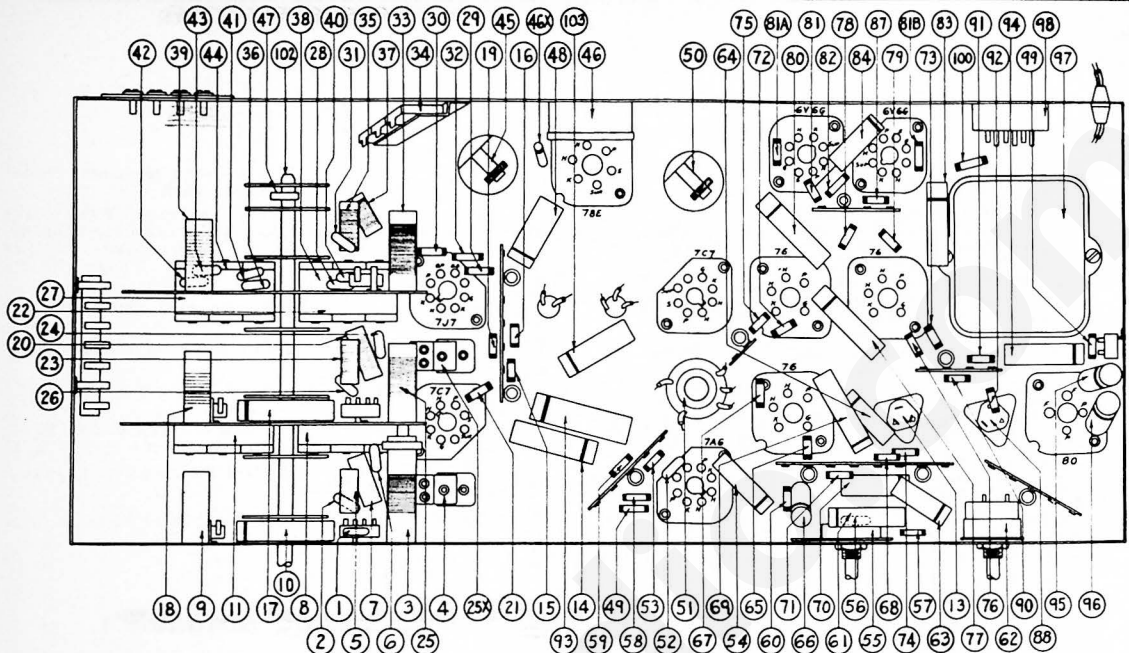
PART LOCATIONS, UNDERSIDE OF CHASSIS
